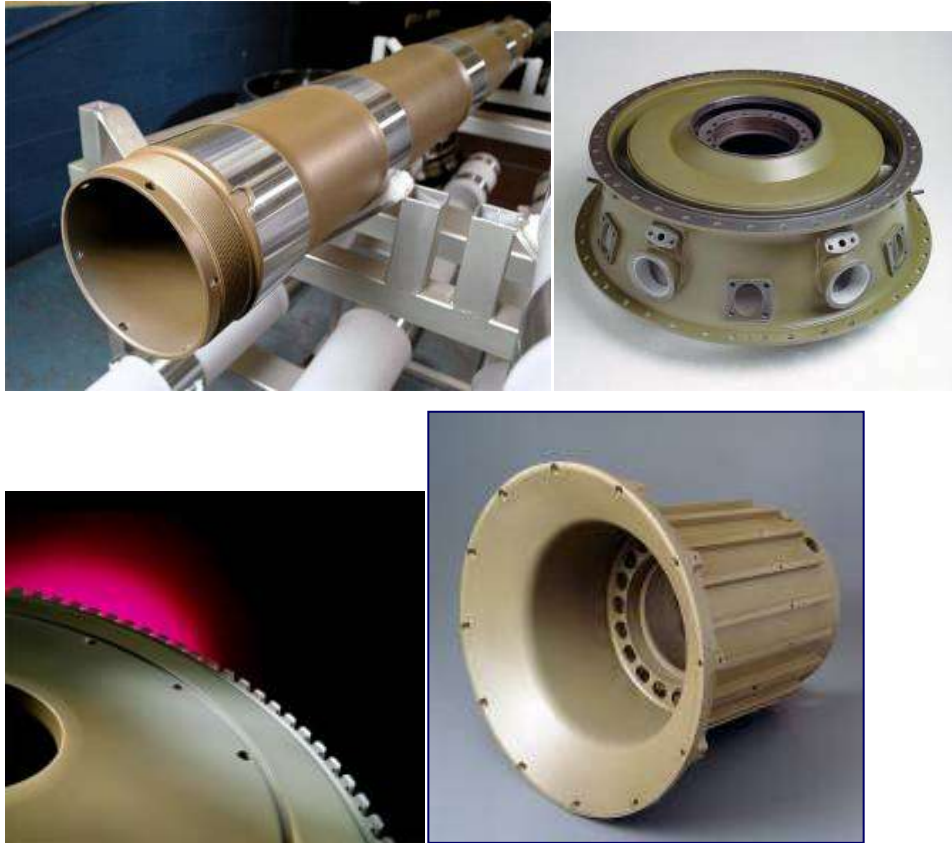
SermeTel 725/2F-1 – sealed sacrificial aluminium/ceramic composite, landing gear, engine cases, IGT disks
